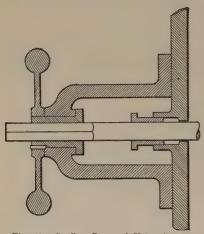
Stuffing Box and Valve Spindle of Meyer Gear
